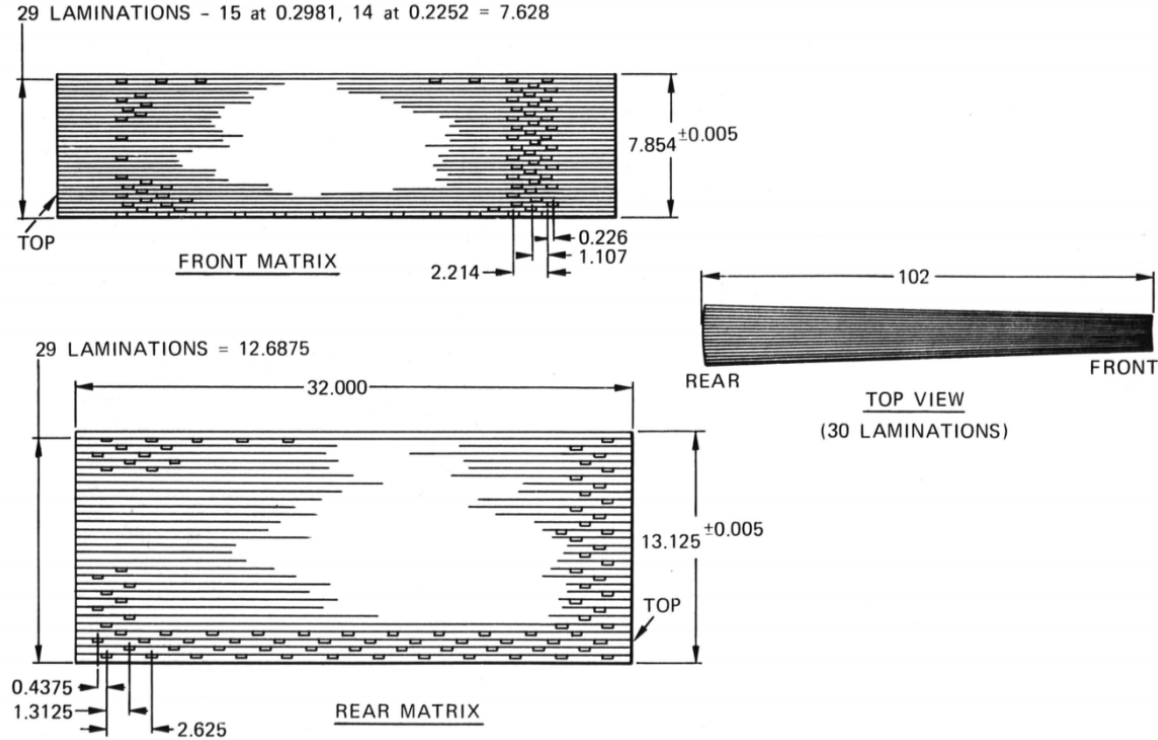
Assembly of the four types of milled plates to produce the overlapping and converging configuration of the TREAT hodoscope collimator (reprinted) [2].
